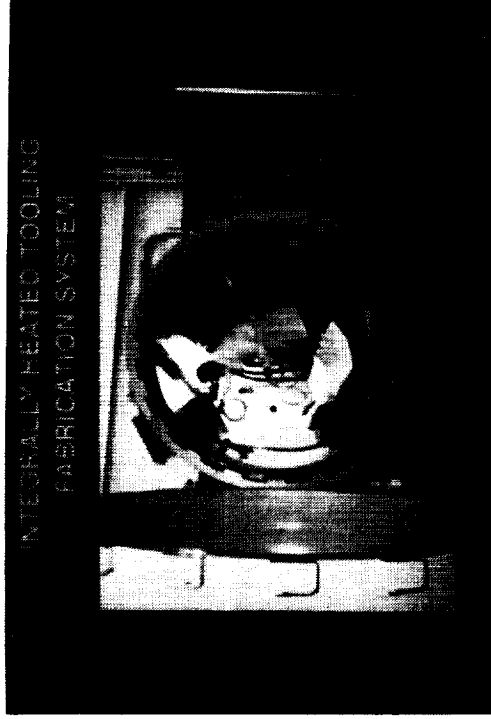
Integrally Heated Tool and Pressure Vessel Fabrication System
